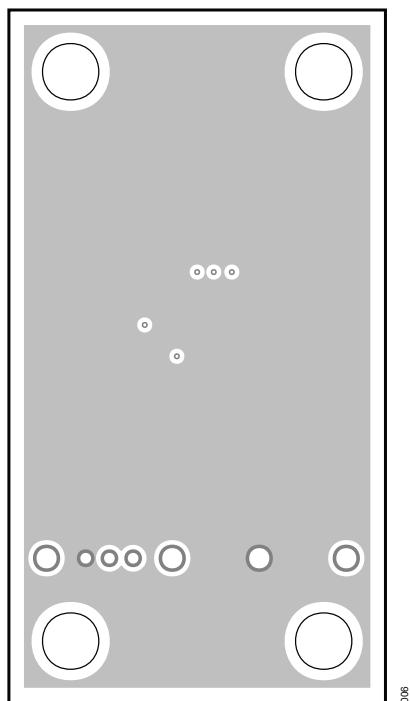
EVAL-ADPL21610-AZ PCB Layout—Internal 2
